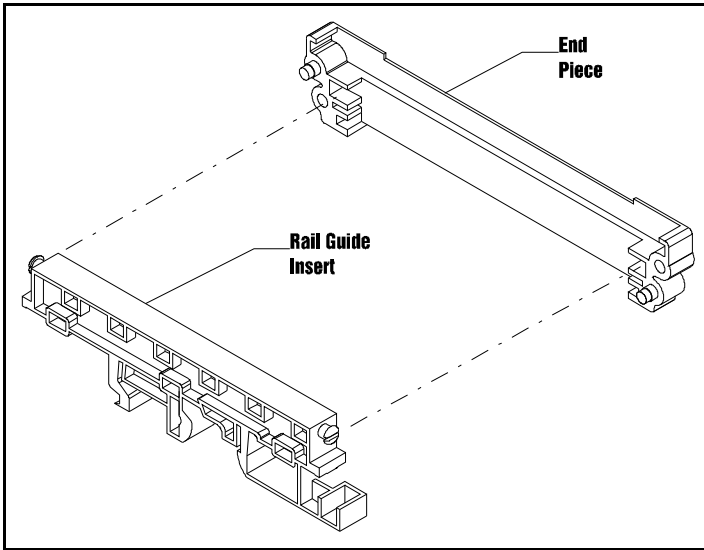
INSTALLING THE RAIL GUIDE INSERT INTO THE END PIECE
